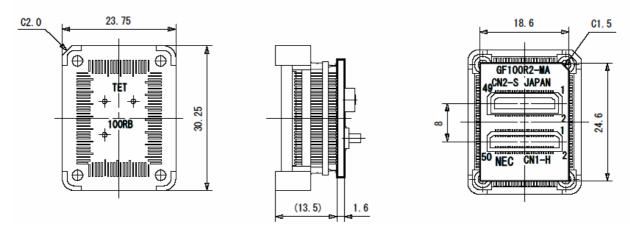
Mounting Adapter for V850E/IA4 (100-Pin GF Package)
